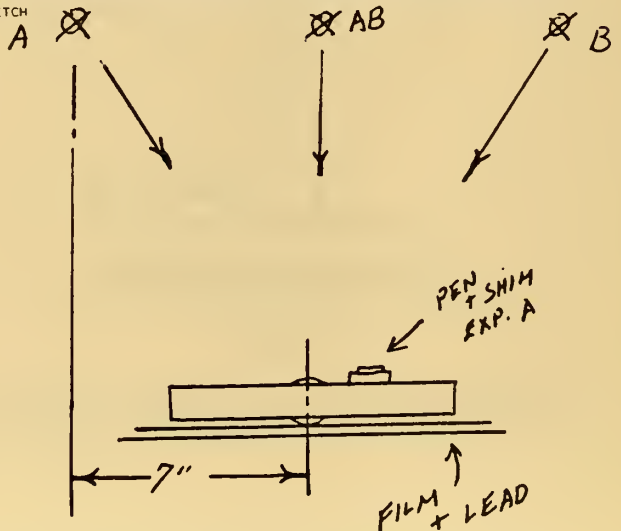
Radiographic Inspection Sheet for Sample B-1
